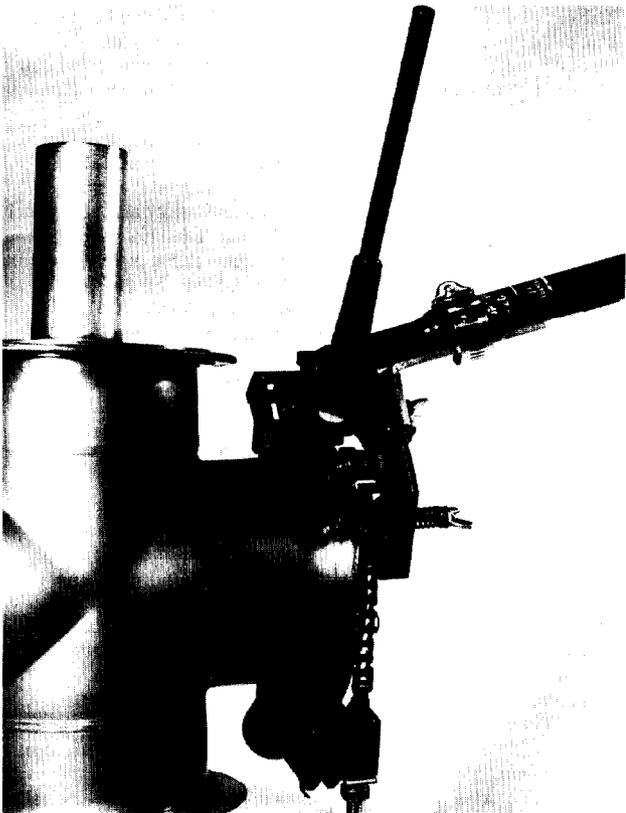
Automatic edge welding tool showing T.I.G. stinger.
